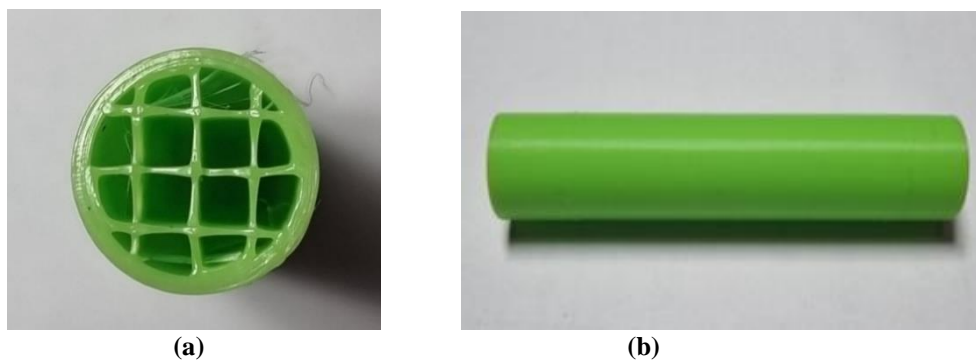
(a) Top View of 3D Printed PLA Pin (b) Side View of 3D Printed PLA Pin
